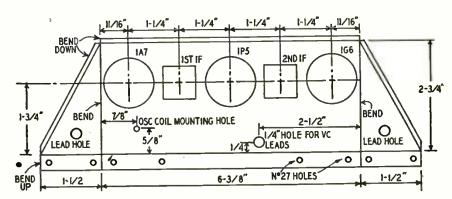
Suggested layout for the chassis of the portable receiver. Mounting holes for the i.f. transformers and tube sockets will depend on the types used. The chassis can be formed from 22-gauge aluminum or cold-rolled steel.
